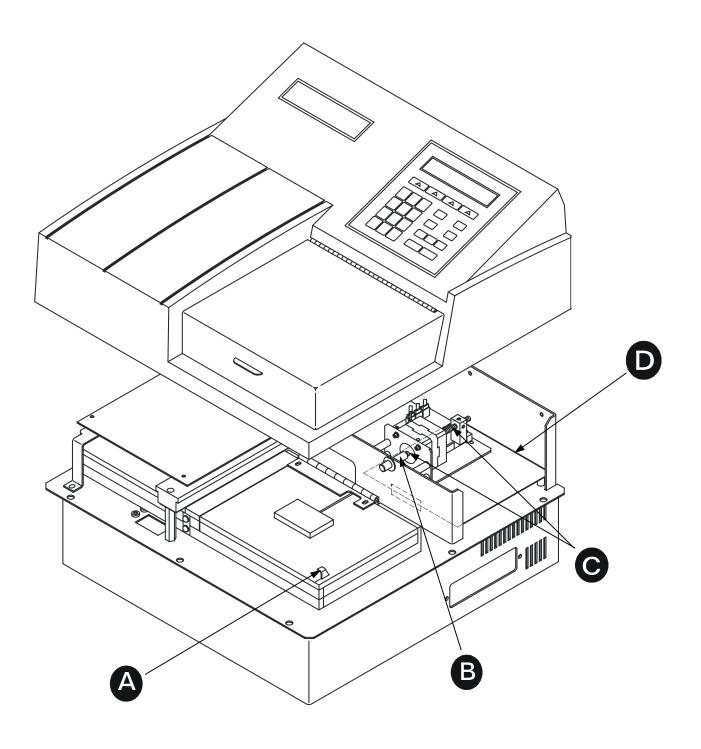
Location of bracket, motor shaft, mylar sheet, and main PCB/motor assembly
